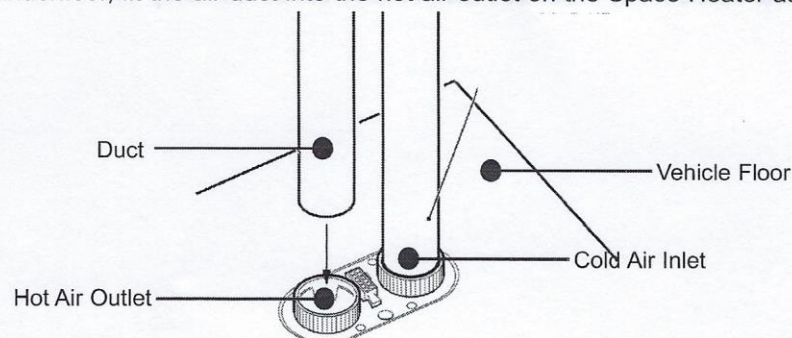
Underfloor Installation - Connect to Hot Air Duct
